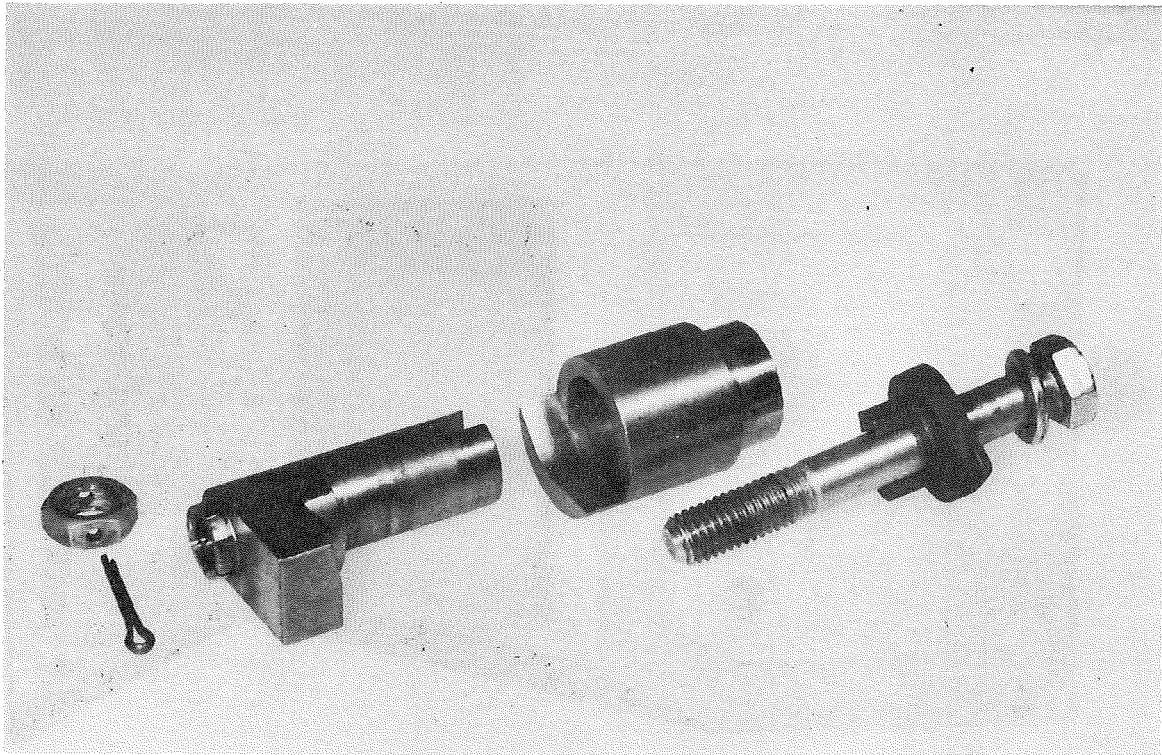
Internal Rotary Keeper Parts for Quick Access Covers
